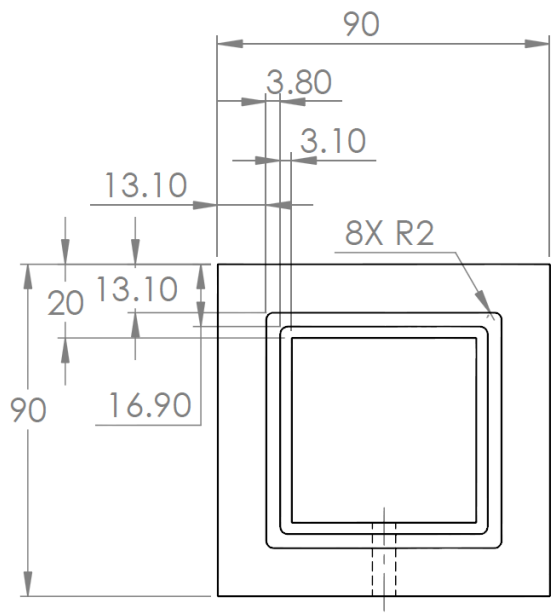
The bead die plate for our prototype design. All dimensions are in mm with a tolerance of 0.1 mm unless other specified.
